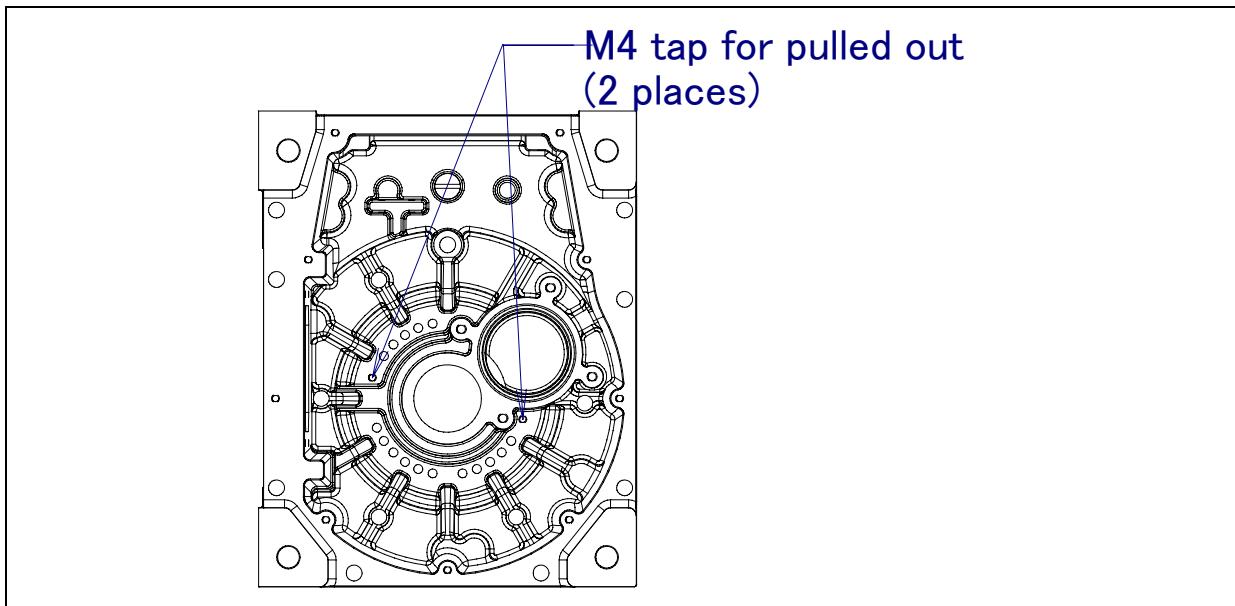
(d) Position of taps for pulled out to remove J1 base.
